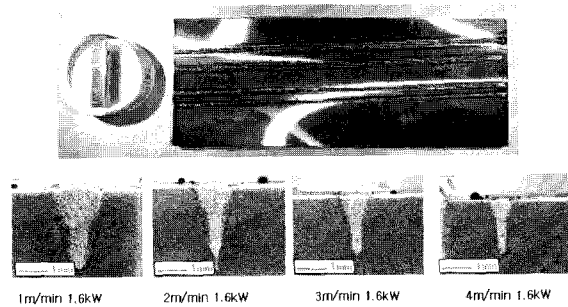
Cross-section of laser welding steel plate (4t) using IPG fiber laser.
